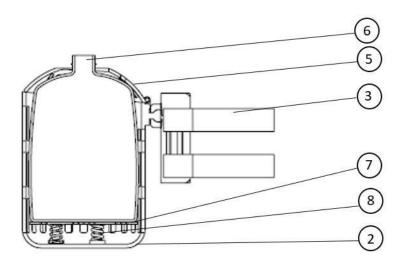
Interior sectional view of wearable modular chest tube carrying apparatus for lower extremities
